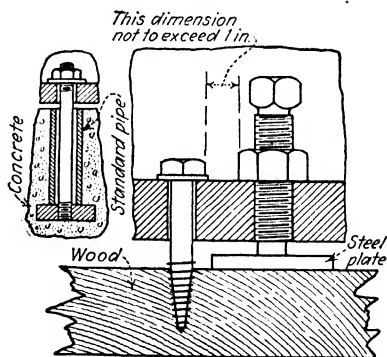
Westinghouse standard floor fastening for machine tools.
